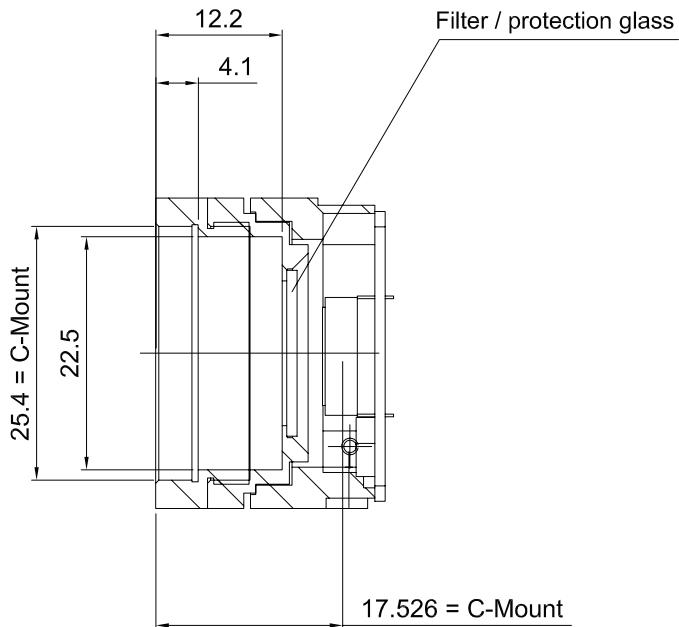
Guppy C-Mount dimensions (new CS-/C-Mounting)
